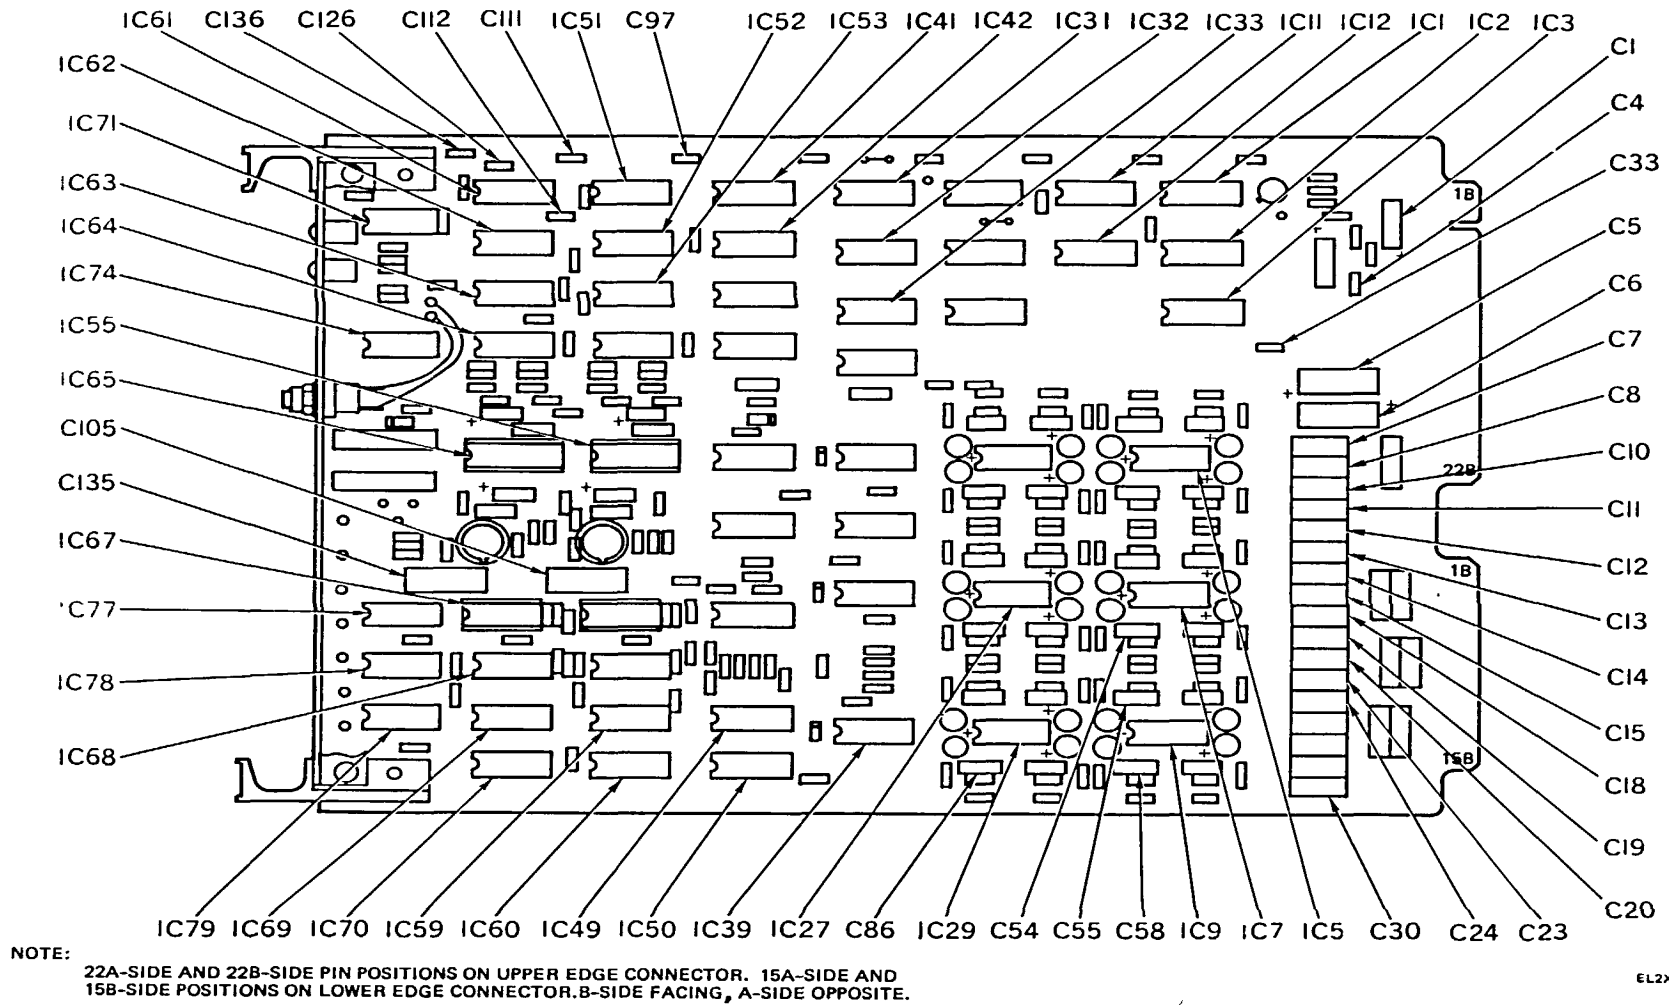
PCM unit parts location diagram (sheet 13 of 14) PCM06.
